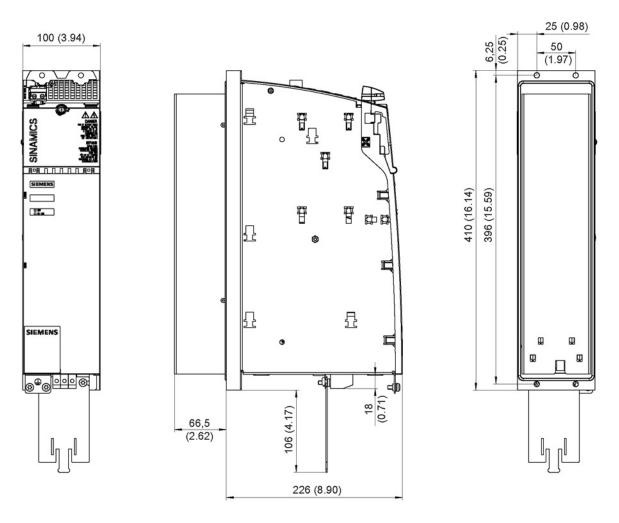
Dimension drawing of 16 kW Smart Line Module with external air cooling, all dimensions in mm and (inches)
